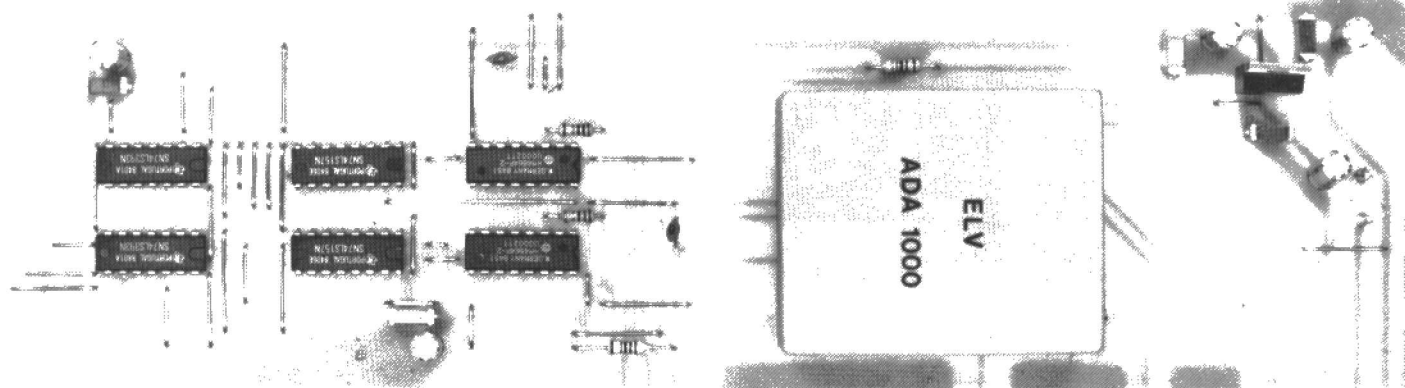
Top views of the printed circuit boards, and their component mounting plans.
